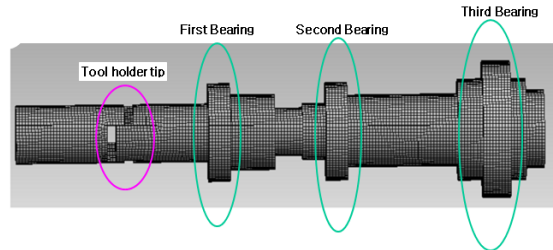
Finite Element Modeling of Tool Holder Spindle
